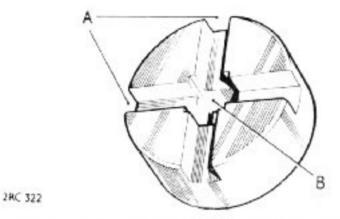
Torque spanner adaptor RO 1013 for mainshaft nut spanner.
